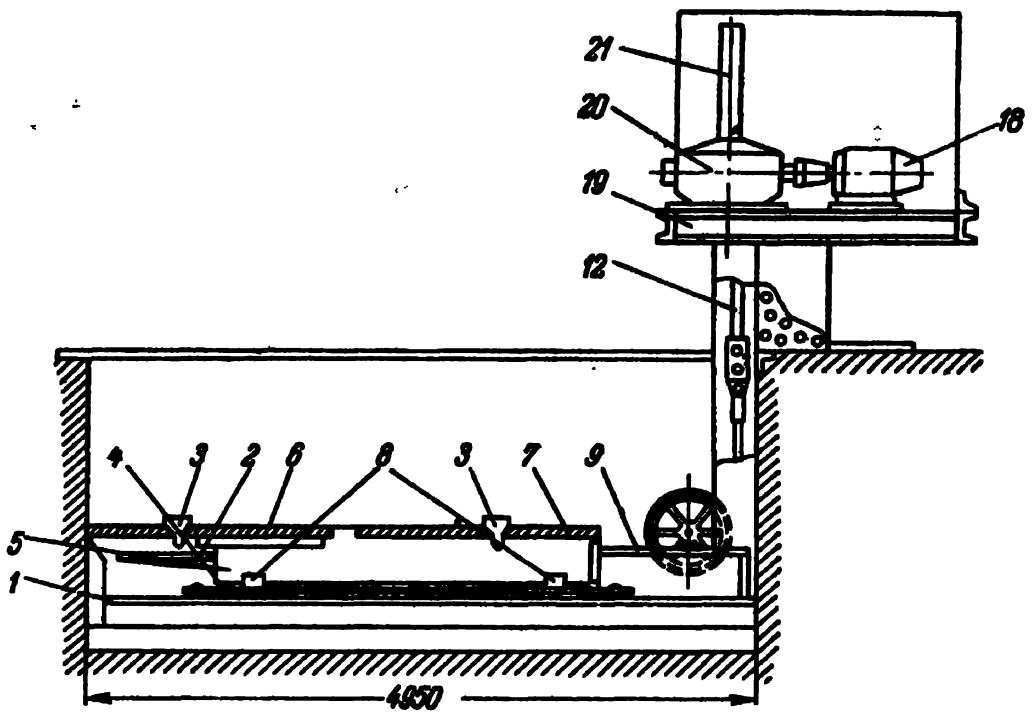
Permanent moulding pit and mould for the blade of a hydraulic turbine
